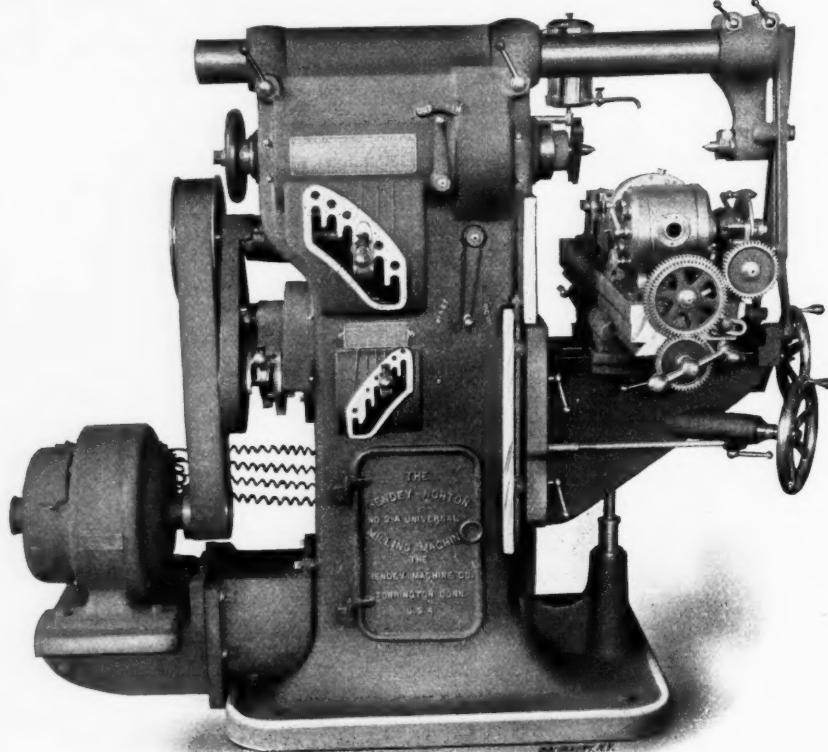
Hendey-Norton, Geared Speed Miller, Left Side.
